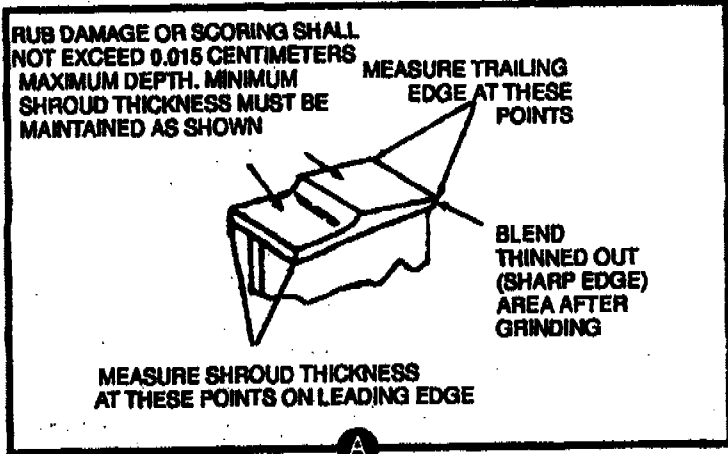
First Stage Power Turbine Rotor and Spacer Dimensional Inspection Locations (English).
